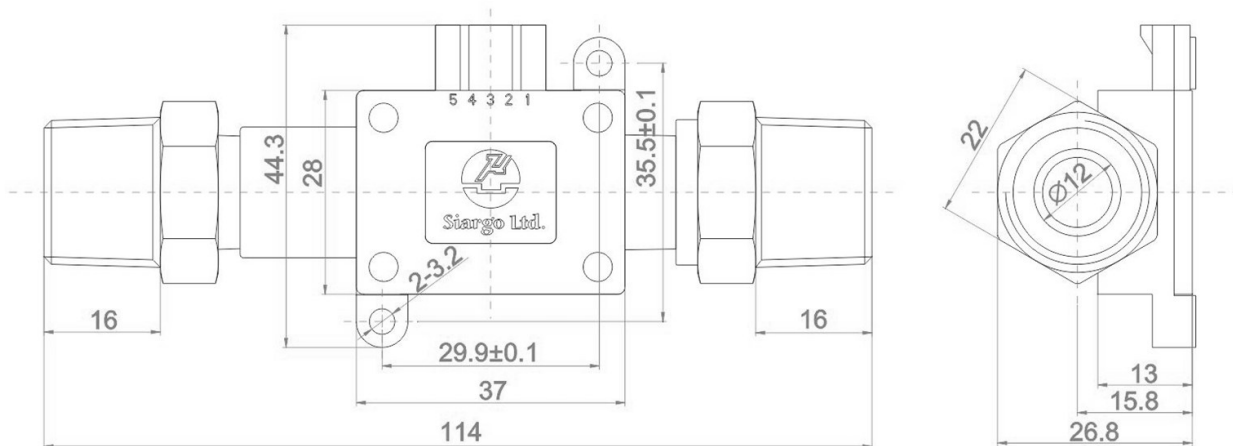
FS1015E mechanical dimensions with 1/2" NPT connectors.
